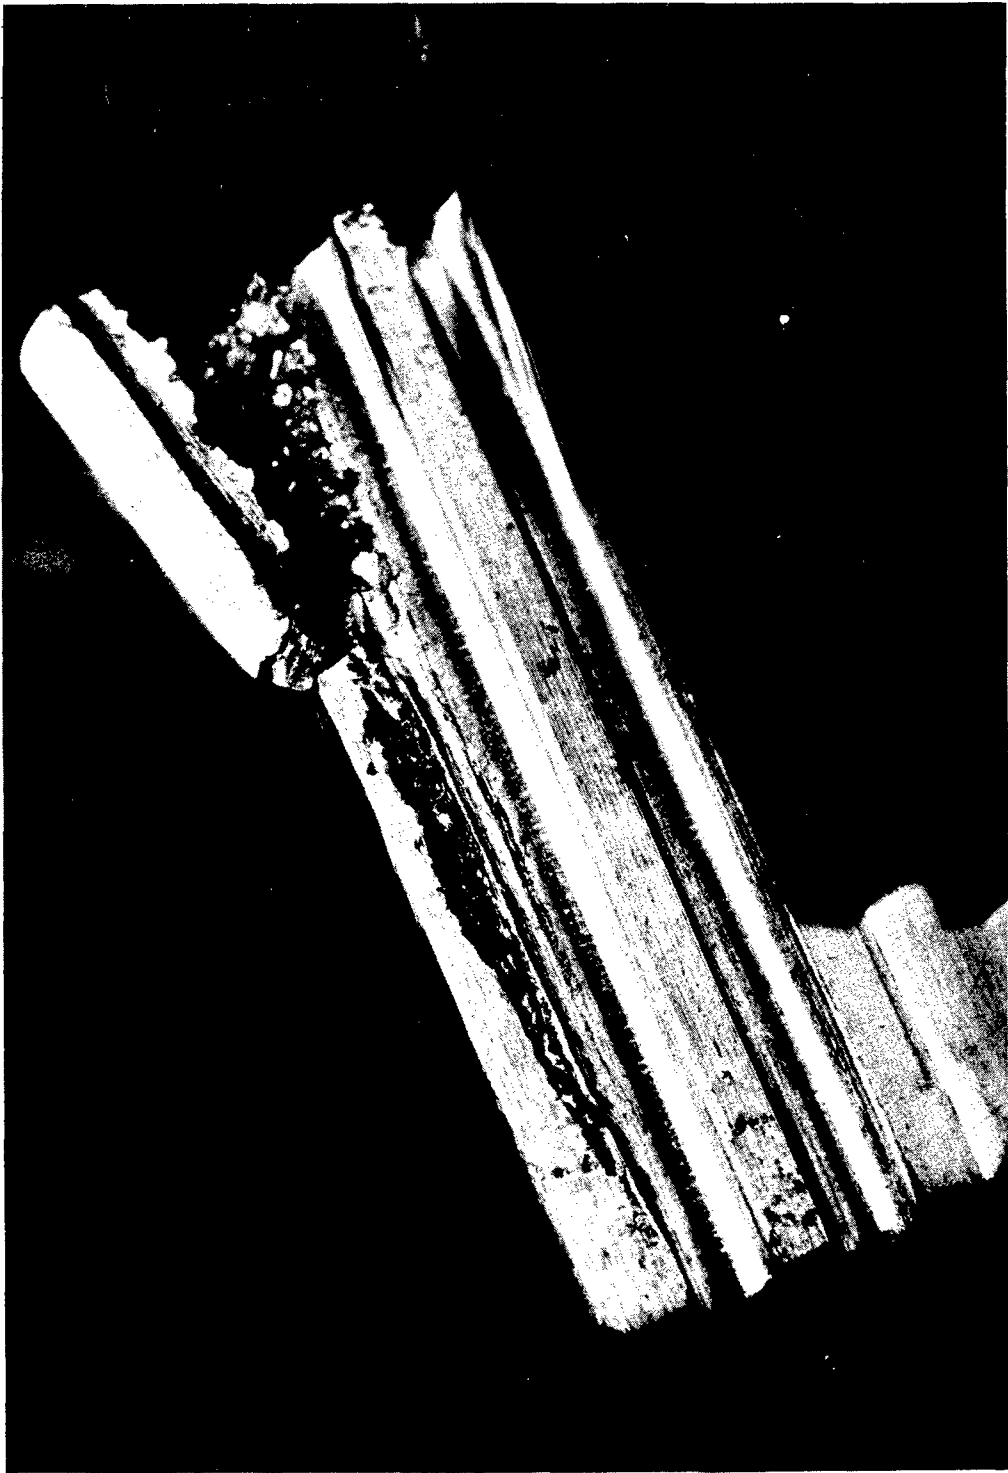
Fluid-Cooled Rotor Hub - Test Specimen.
